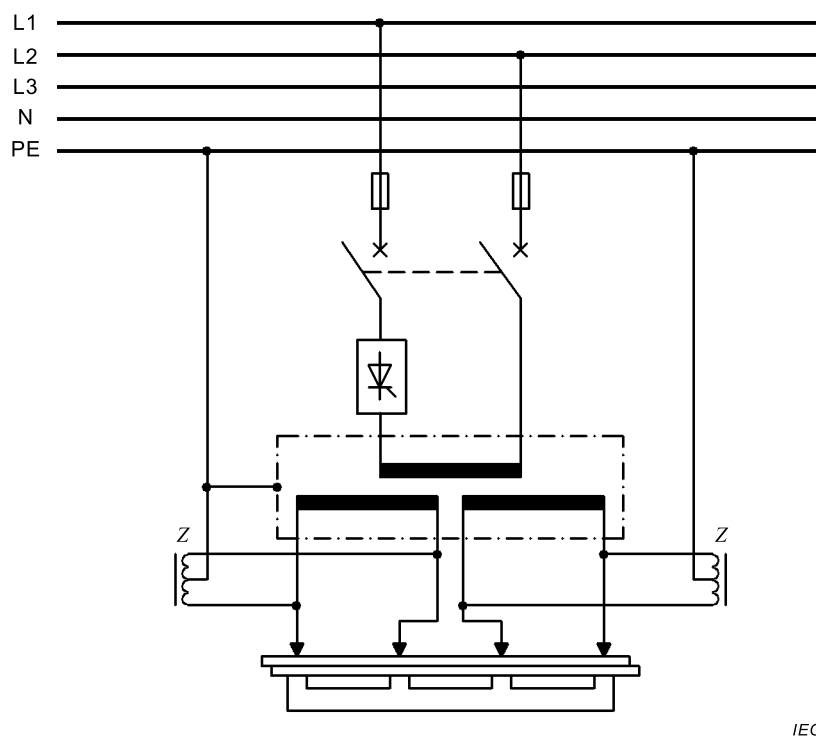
Example of protective conductor connected to welding circuits through auto-inductances
